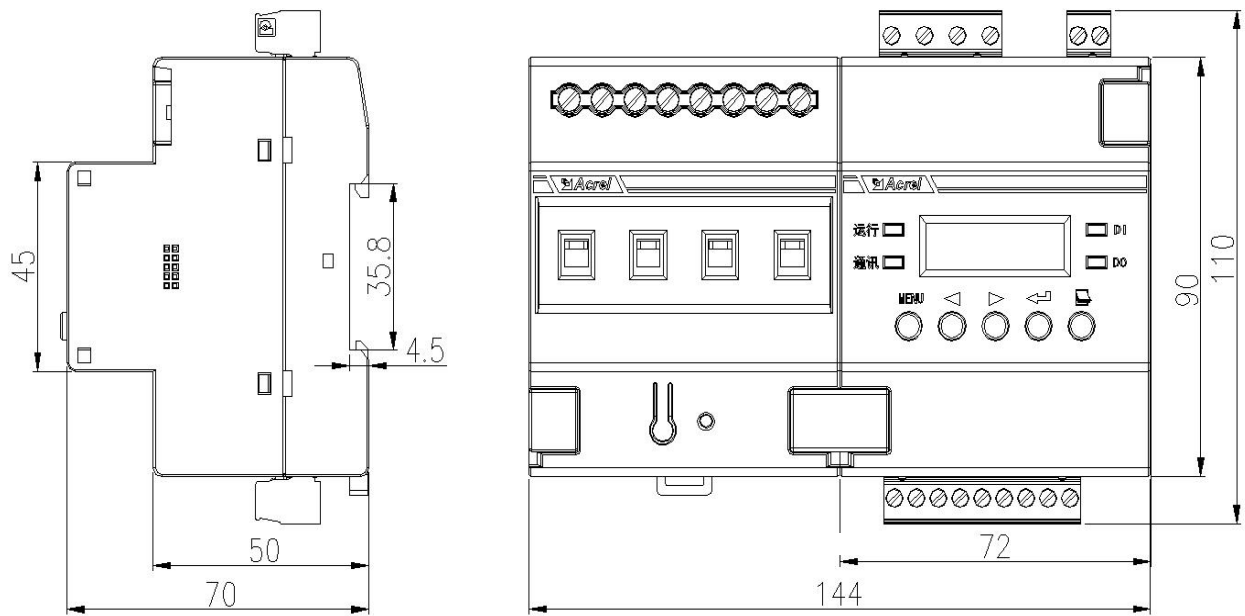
A SL220Z-Sx / 16 switch drive profile and installation dimensions
